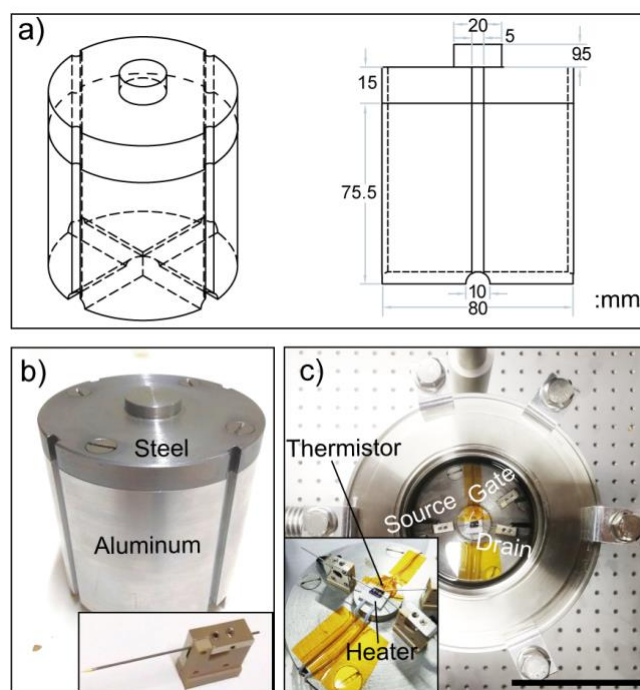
Home-built sample stage. a) Isometric 3D sketch of home-built sample stage (left panel) and side view with indicated the corresponding dimensions in millimeters (right panel). b) Close-up photographs of the as-machined home-built sample stage and the miniature probe with bottom magnets. c) Top view of the sample stage surface as seen through the optical window. The inset is a close-up image of the ceramic heater, thermistor and three miniature probes (source, drain and gate). The scale bar is 50 mm.
